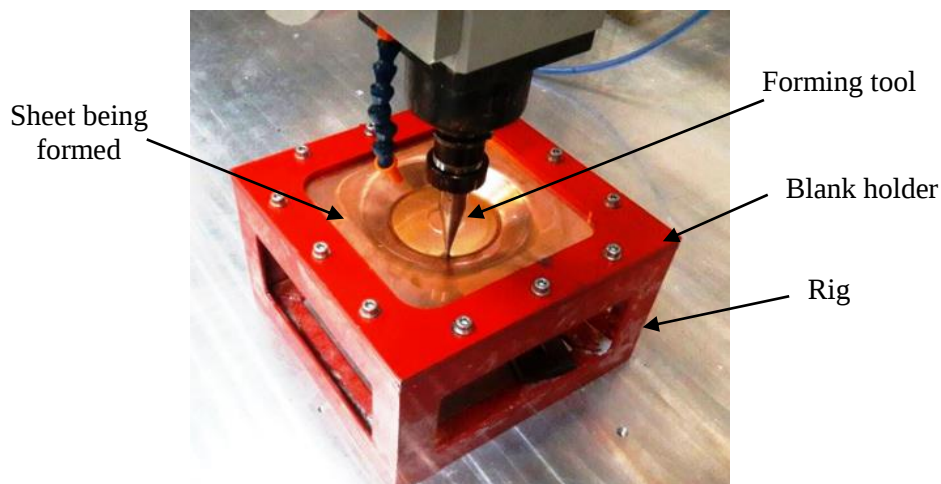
Sheet formed by forming tool and rigidly clamped on rig
